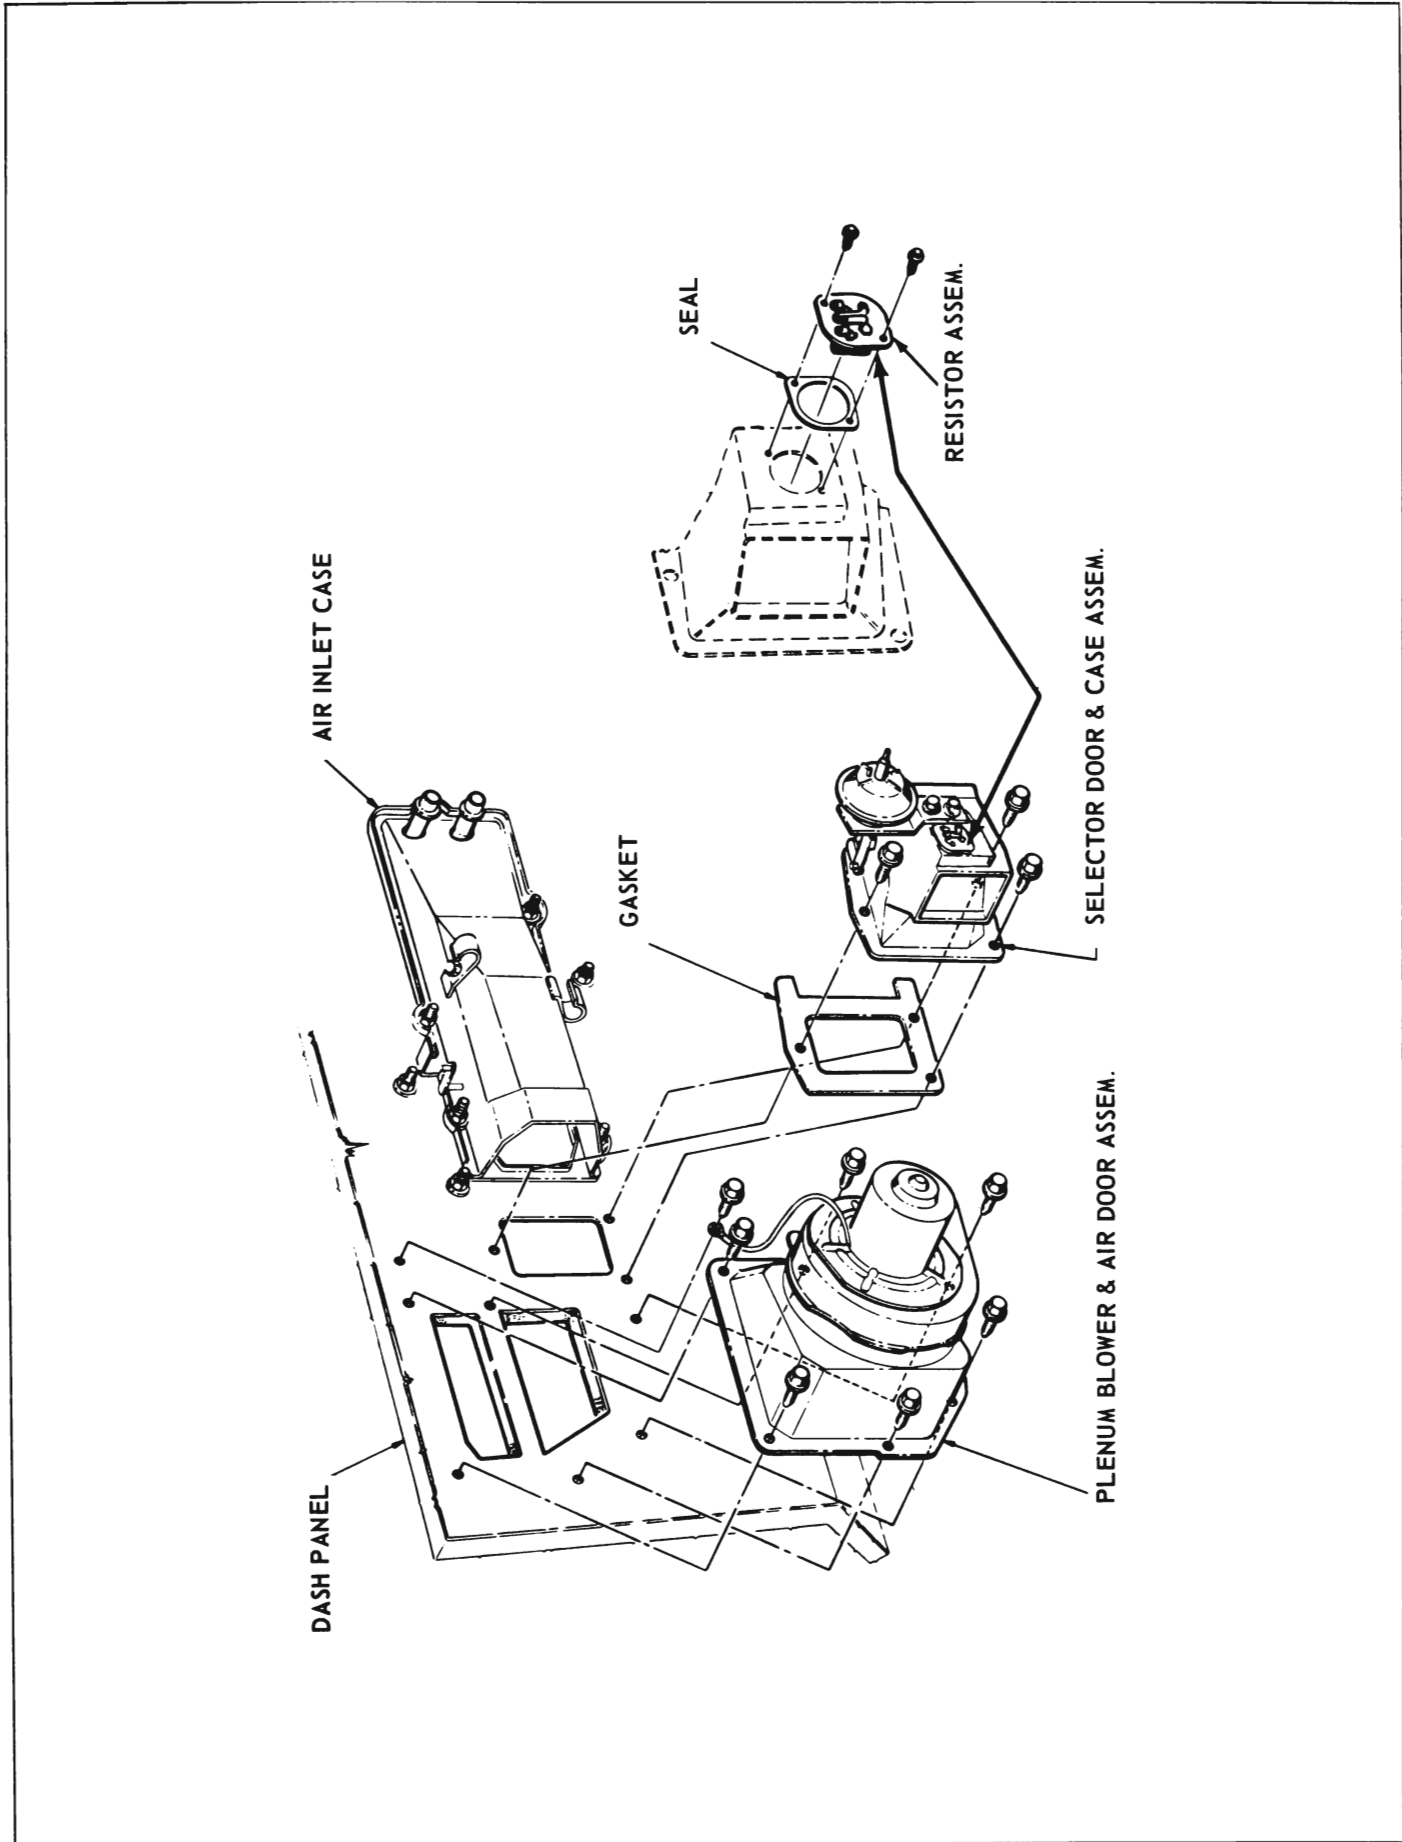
Plenum Blower and Air Door Assembly, and Selector Door and Case Assembly Installation - 4700 Series
